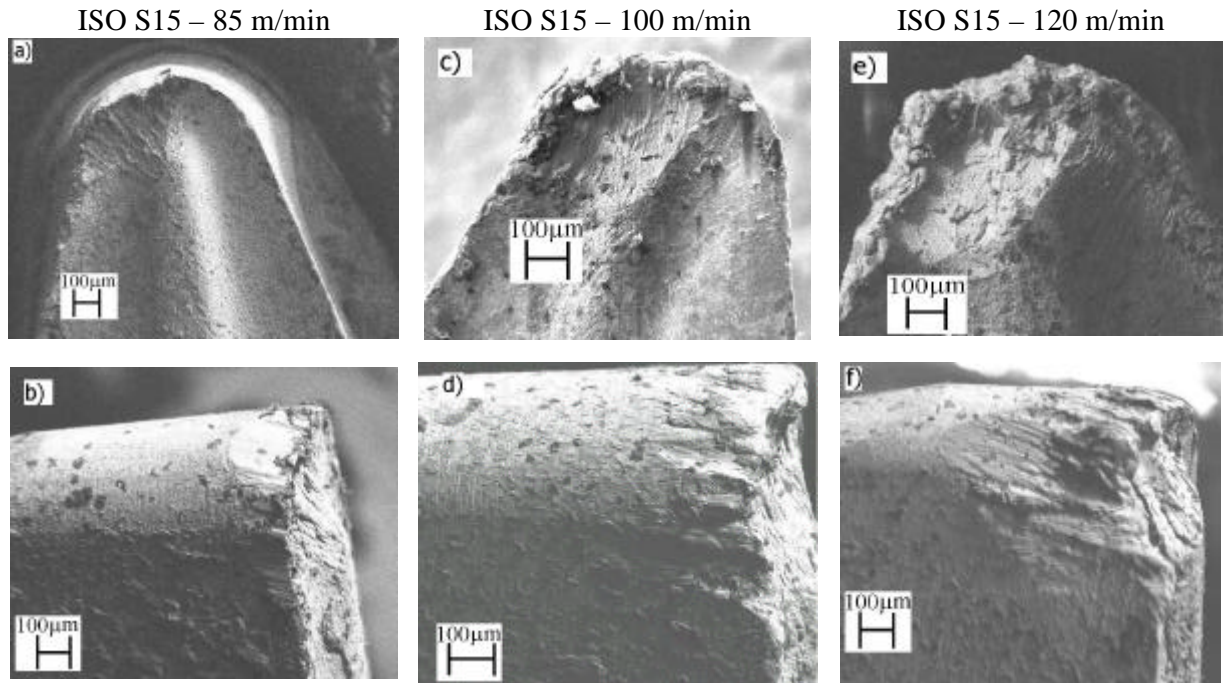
Tool surface and flank wear in the machining of Ti-Al-4V for different cutting speeds using ISO S15.
